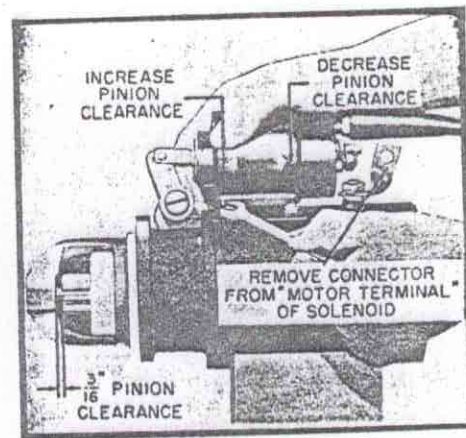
Adjusting pinion clearance on over-running clutch motor equipped with solenoid having a non-adjustable plunger stud
